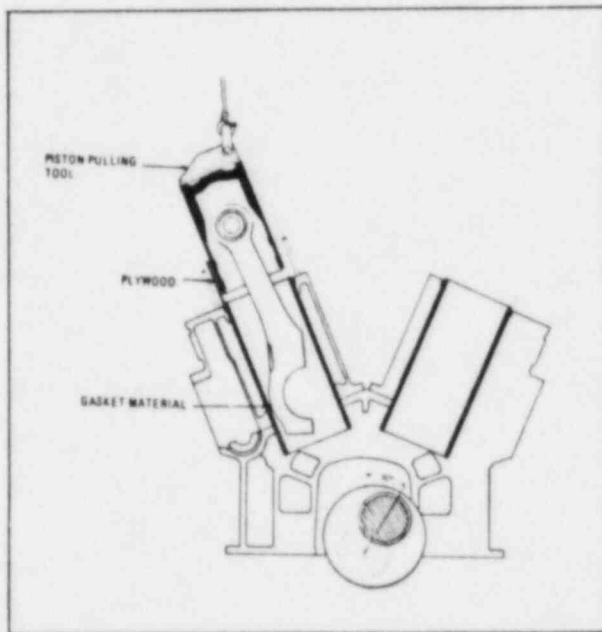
C-6. Lifting Master Rod and Piston From Cylinder Liner.
